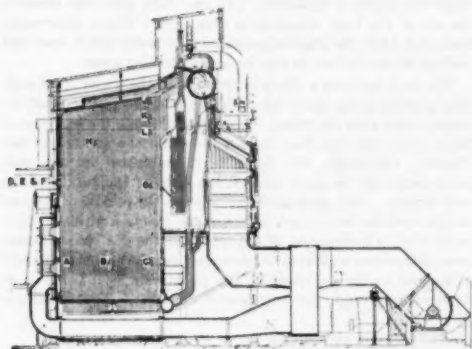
SECTIONAL SIDE ELEVATION OF UNIT
